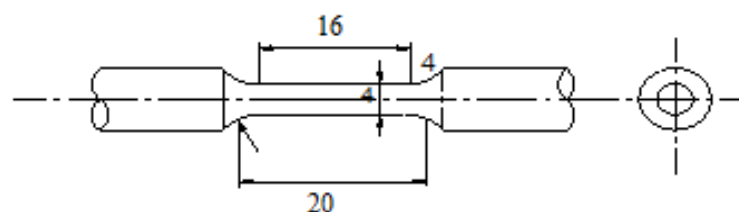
Tensile test specimen (All dimensions are in mm)
